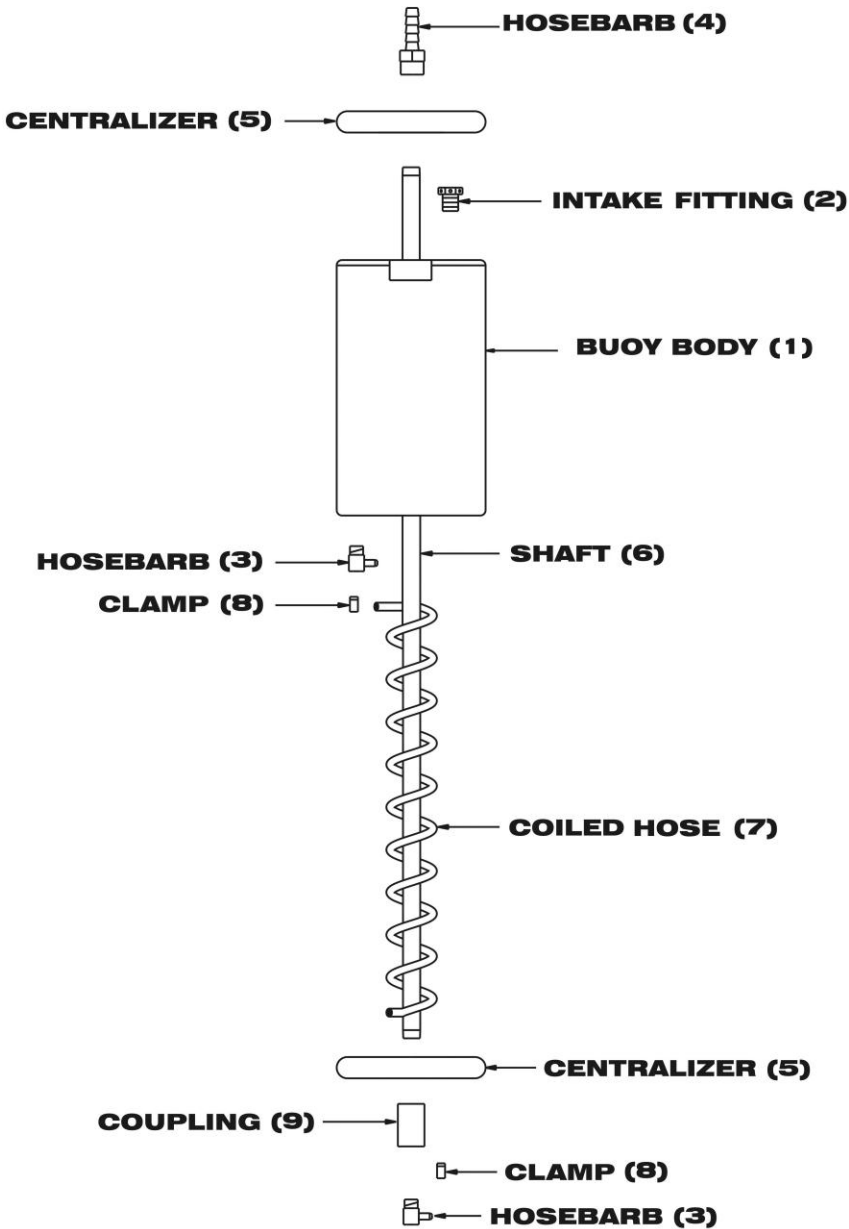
4" Heavy Oil Skimmer Assembly
